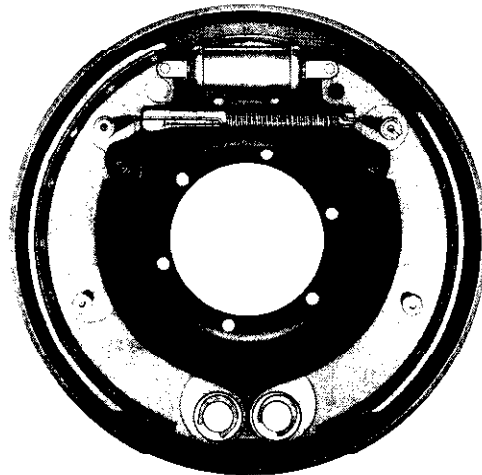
Illustration No. 51—Brake Shoe Assembly—Rear—J-15 and J-20. Note: Except for Emergency Brake Connection Is Also Same as J-20, J-23 and J-30 Front
